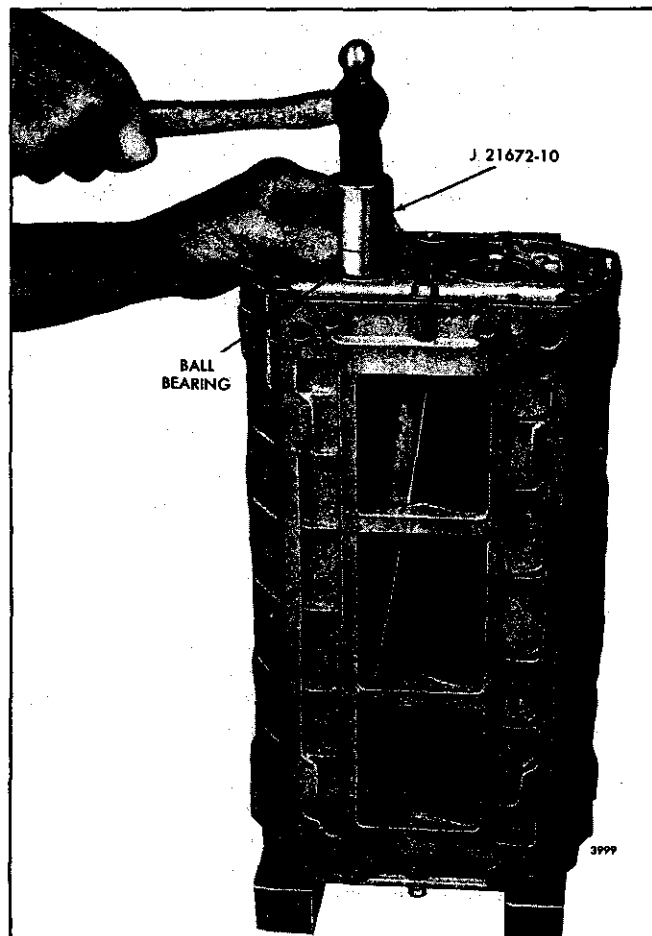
Installing Ball Bearings on Rotor Shafts and in Front End Plate (Former Blower)
